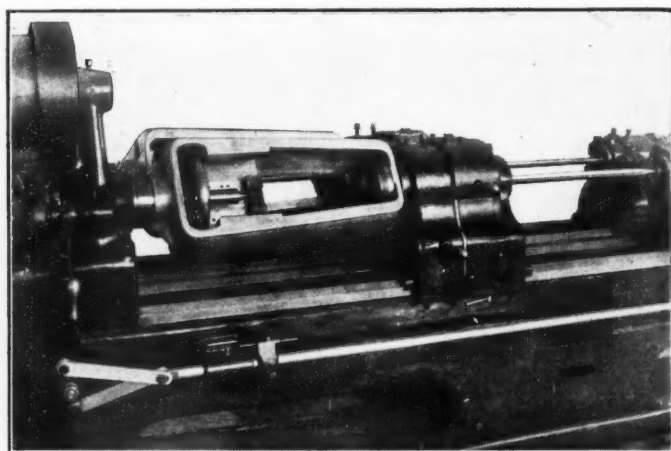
Showing fixture for drilling connecting rods in No. 12 drill
